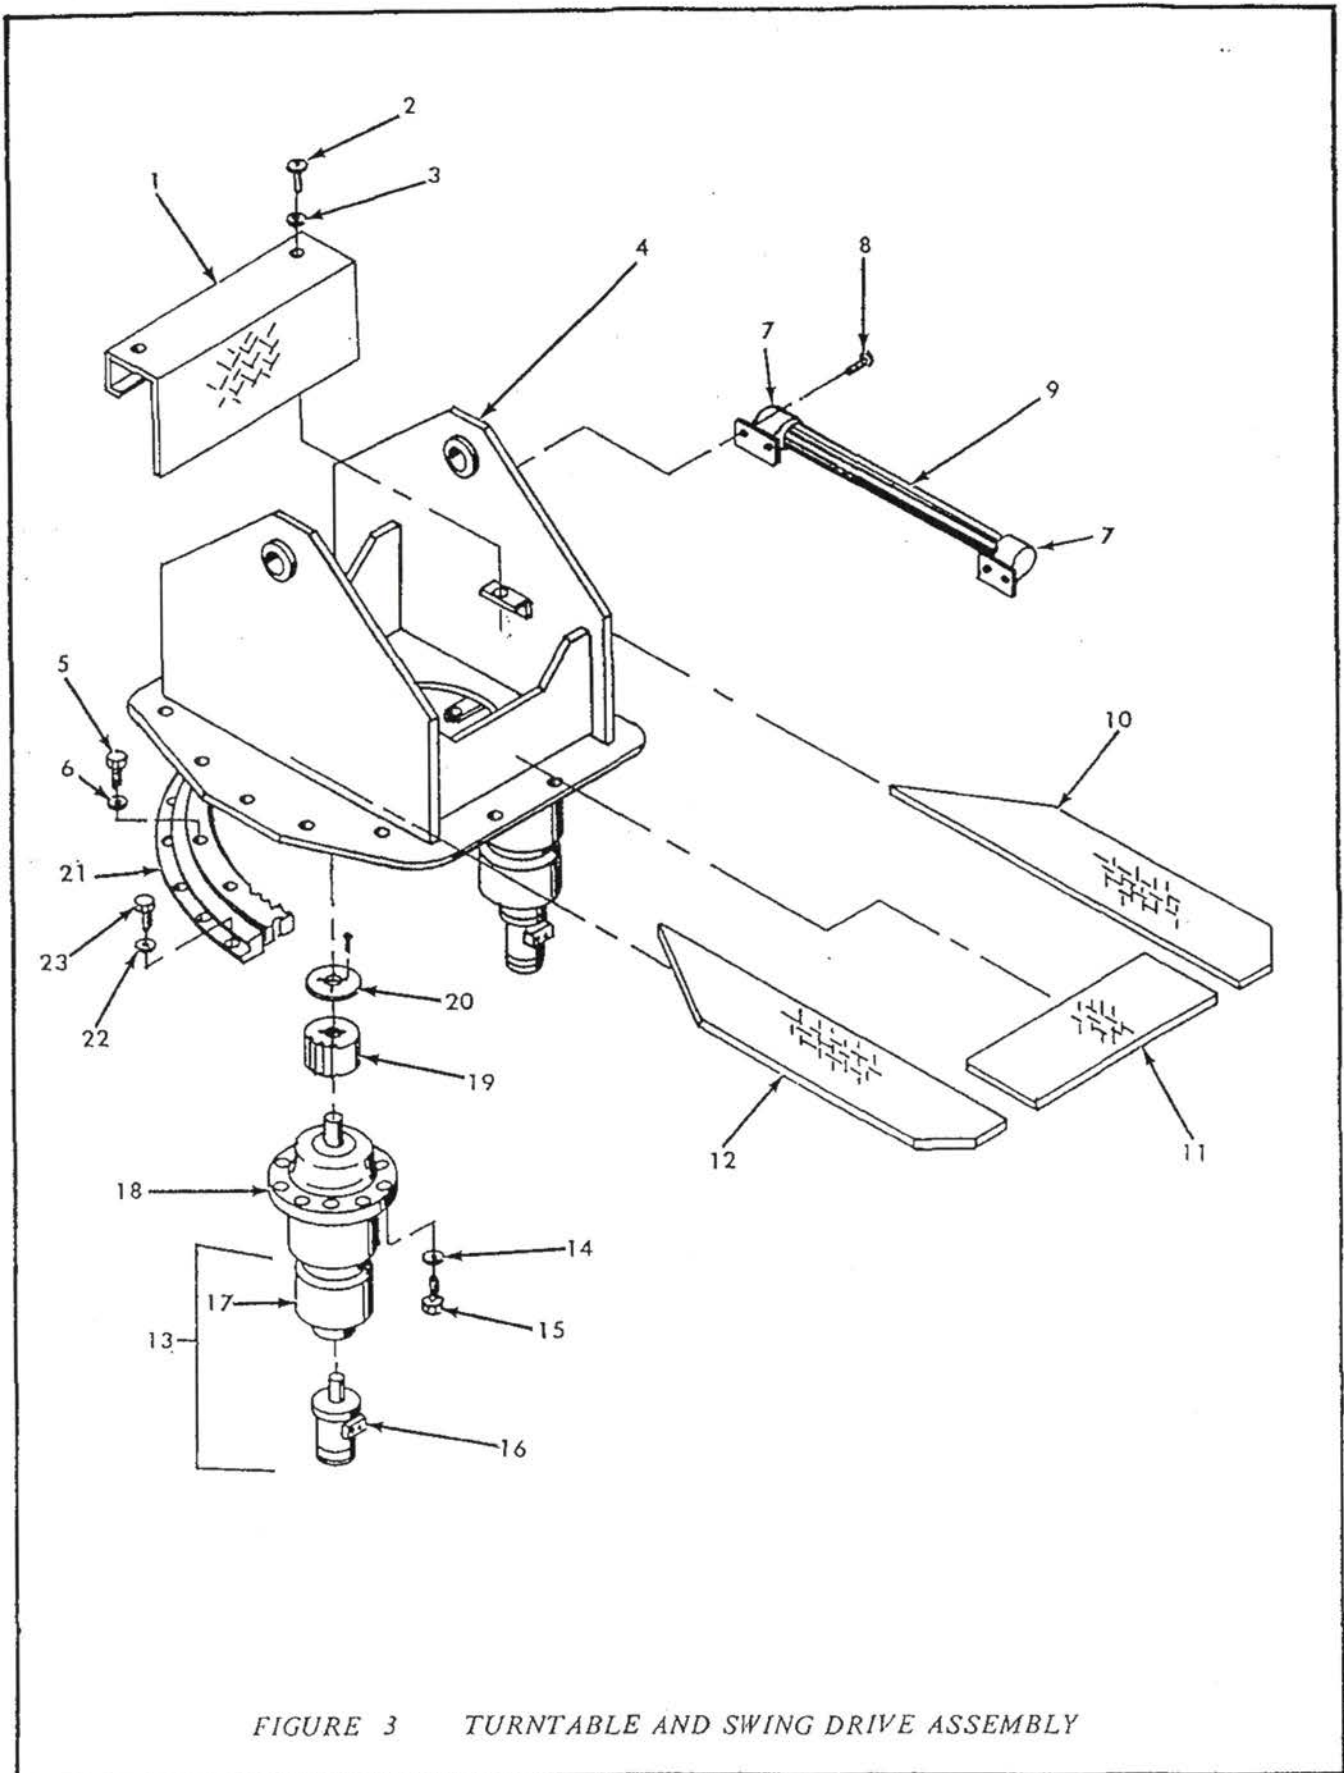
TURNTABLE AND SWING DRIVE ASSEMBLY
